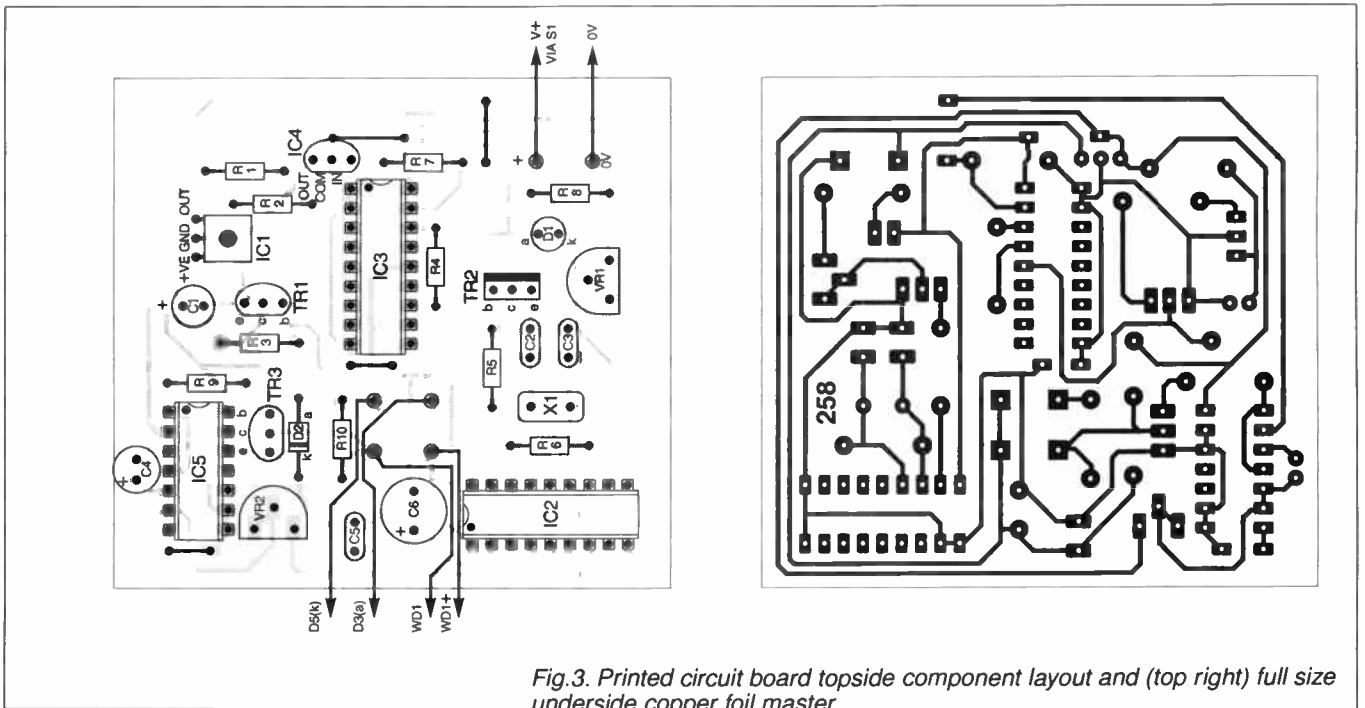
Printed circuit board topside component layout and (top right) full size underside copper foil master.
